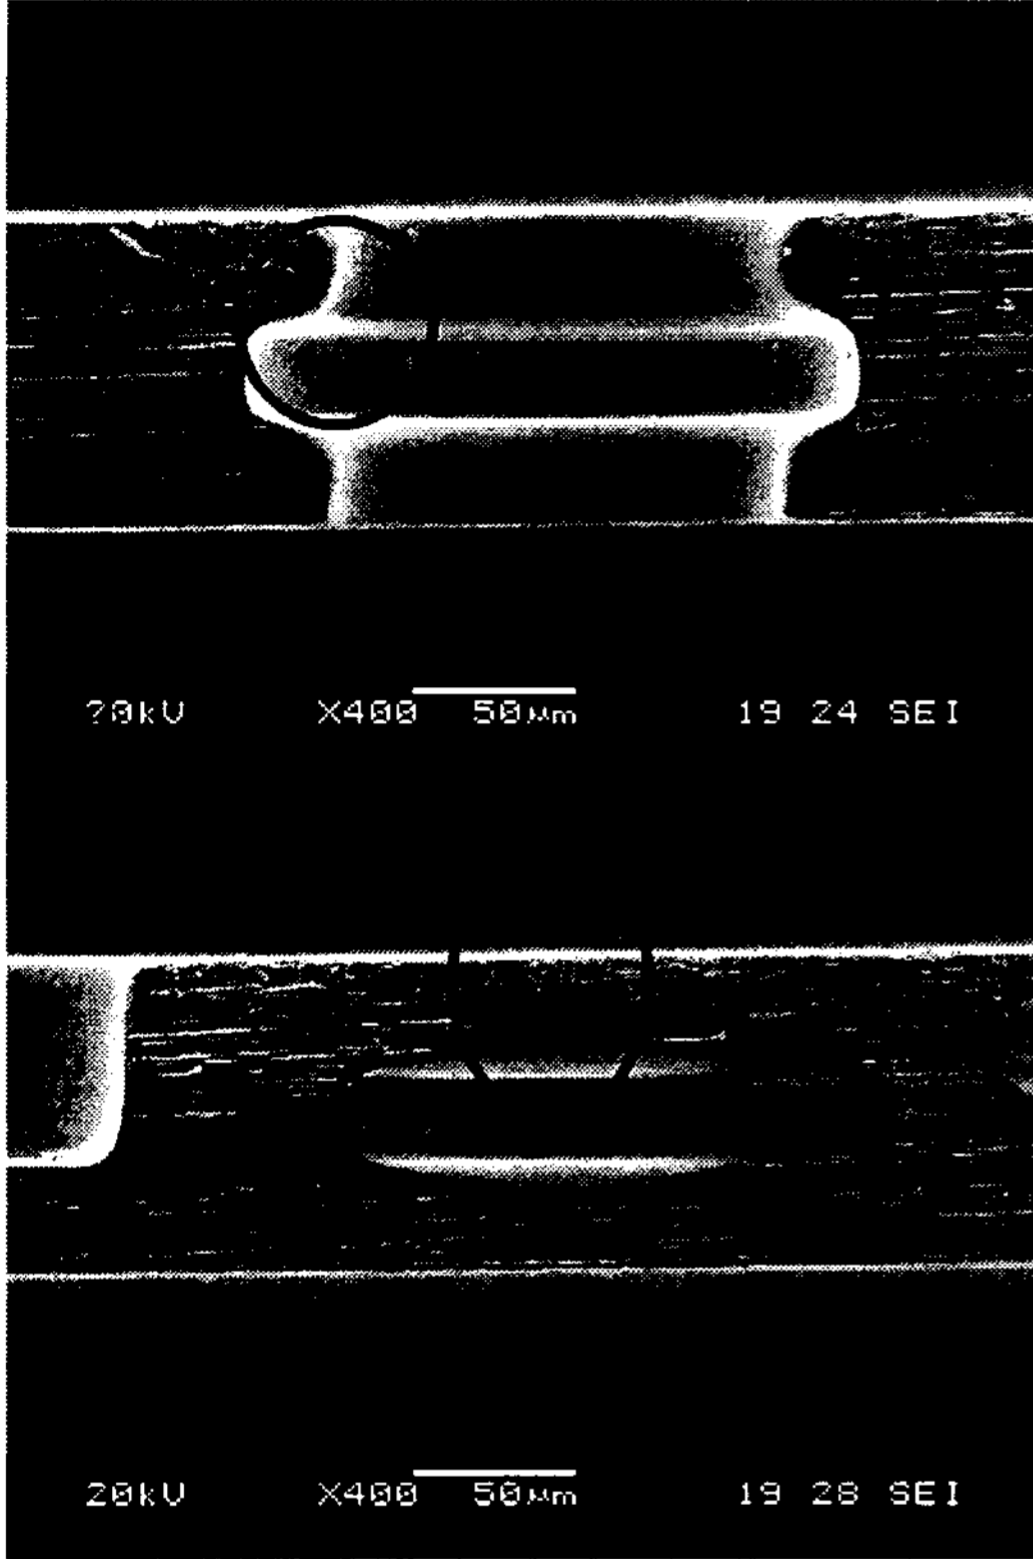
Sectional view of product by using disk electrode: (a) groove in the micro hole, (b) groove
